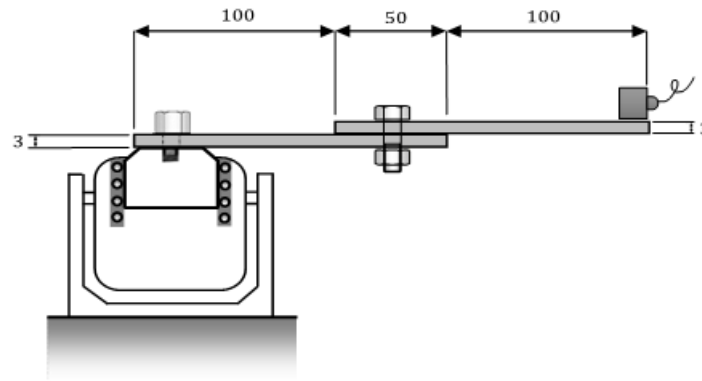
Schematic of Bolt Joints and Simple beam Dimensions in an Exciter System
